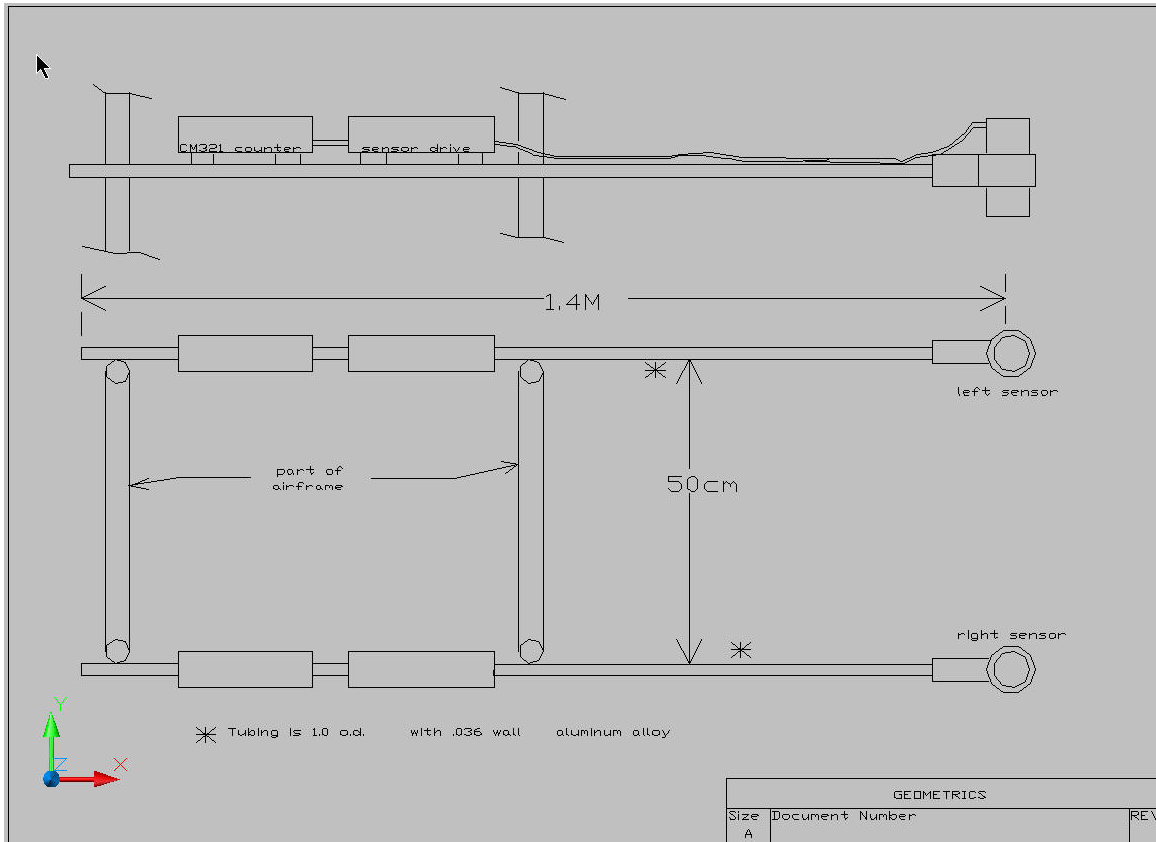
Boom design for a two sensor magnetometer. Note that the electronics components for this boom design could be enclosed in an enclosure directly underneath the UAV, and that the center of gravity for the boom could be designed to be underneath the center of gravity for the UAV
